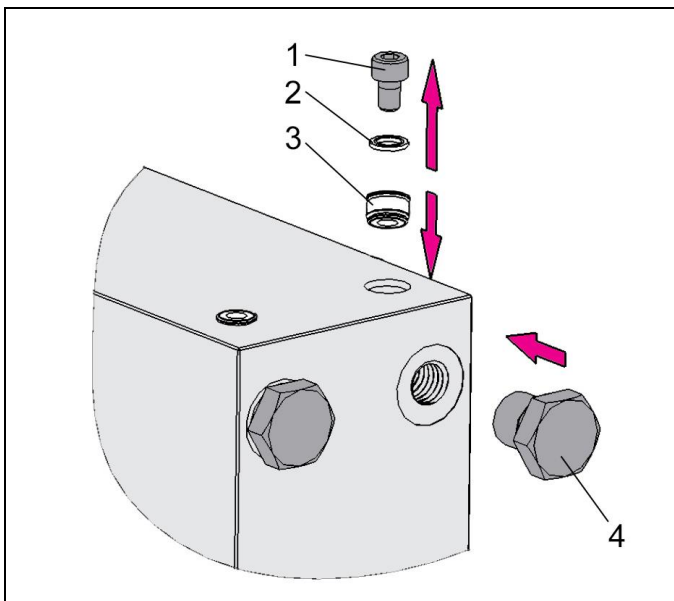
Example of preparation for hydraulic ports without tubes using plug connection for direct connection
